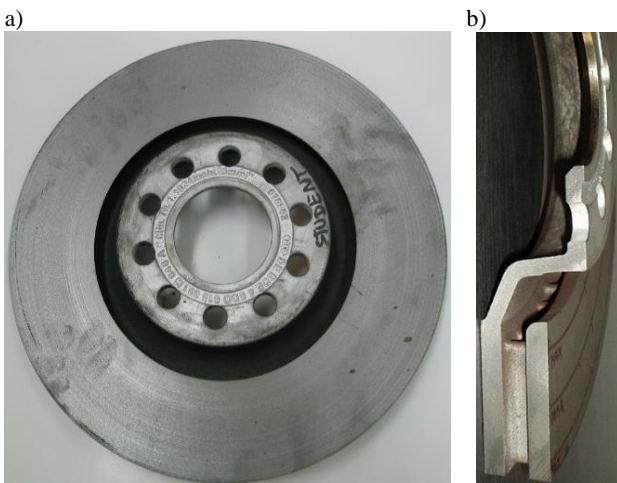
Deformed brake disc: a) general view, b) cross-section of the disc
